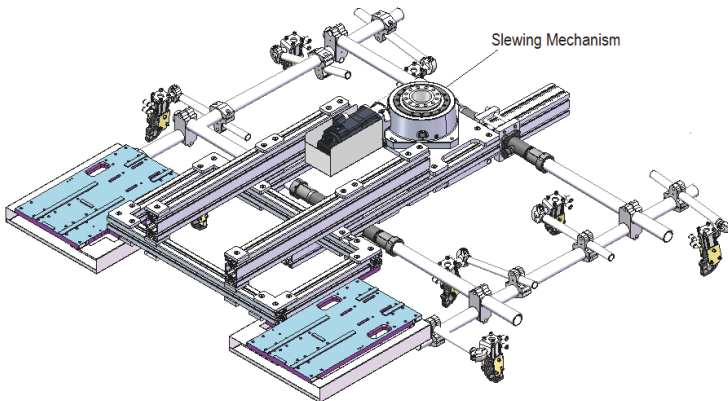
Hot billet loading robot and rotary end pickup mechanism
